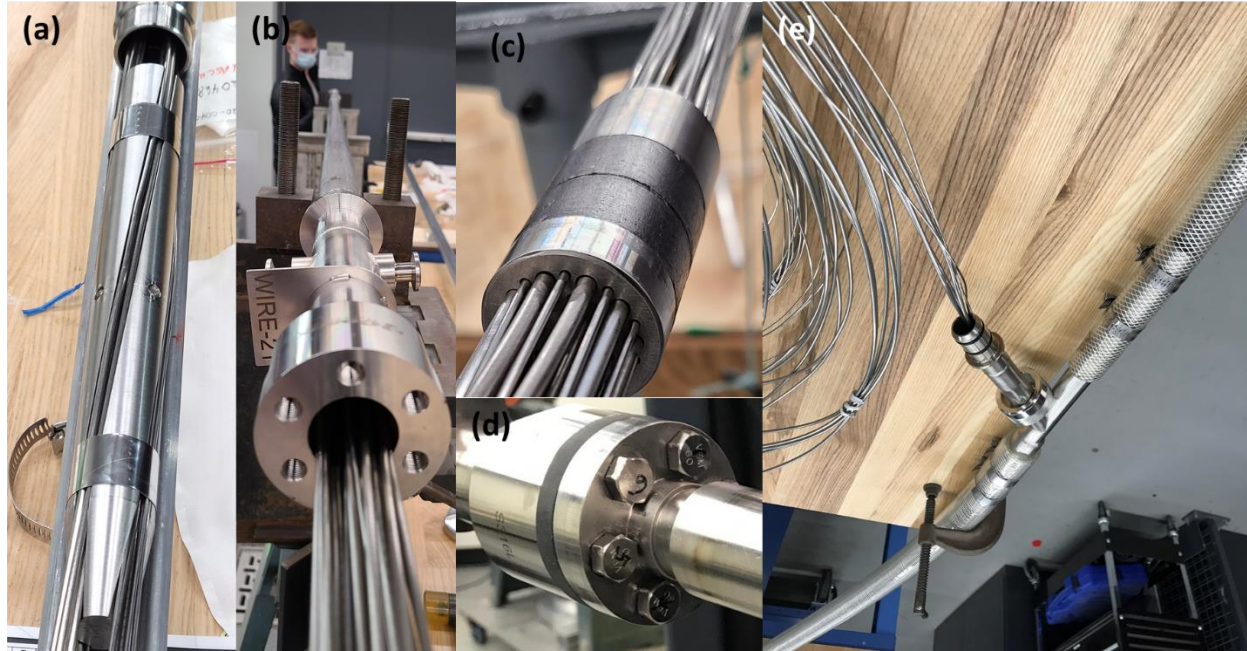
(a) Passing leads through the shield plug inside the experiment containment, (b) passing the leads through the top compression fitting, (c) sliding the compression sealant materials over all the leads, (d) the final sealed compression fitting, and (e) the gas lines splitting off from the sensor leads in the Y-adaptor.
